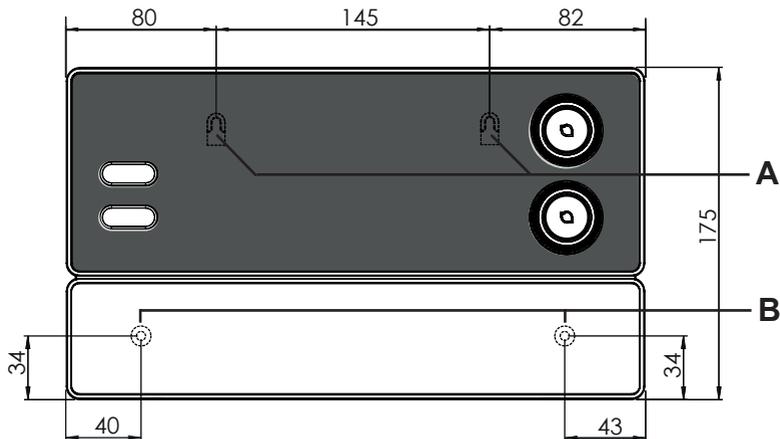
Position of the attachment device and the installation holes (dimensions in mm)
